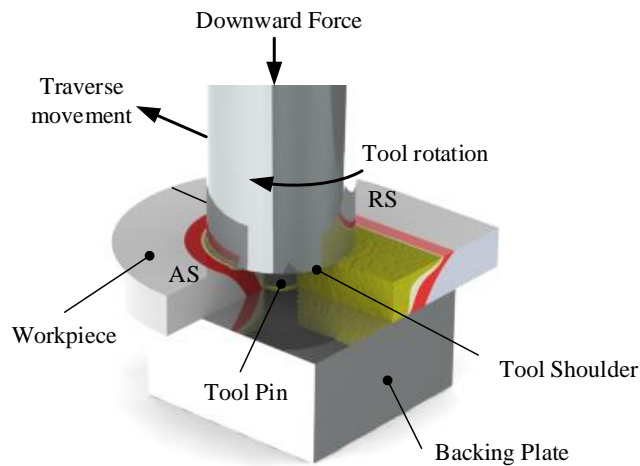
Friction Stir Welding Scheme.
